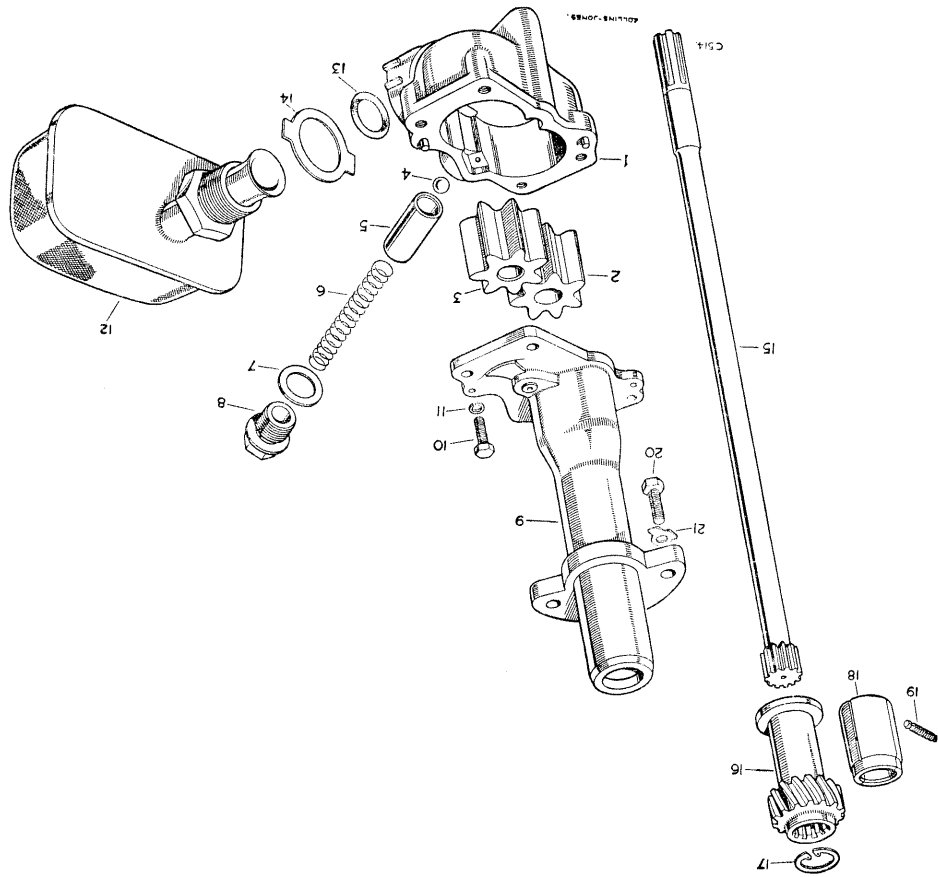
Exploded view of oil pump and driving gear, 2½ litre Diesel
